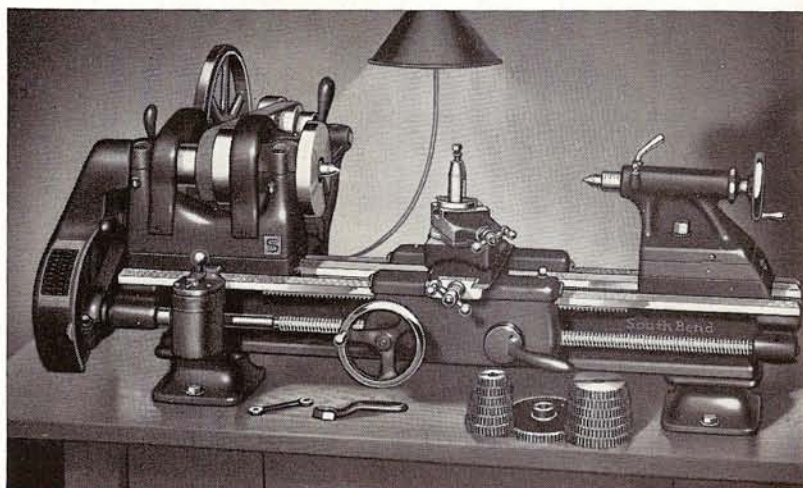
Cat. No. 6415-YA, 9"x3' "Workshop" Horizontal Motor Driven Precision Bench Lathe with Raising Blocks, complete as shown, but less bench. \$147.00
